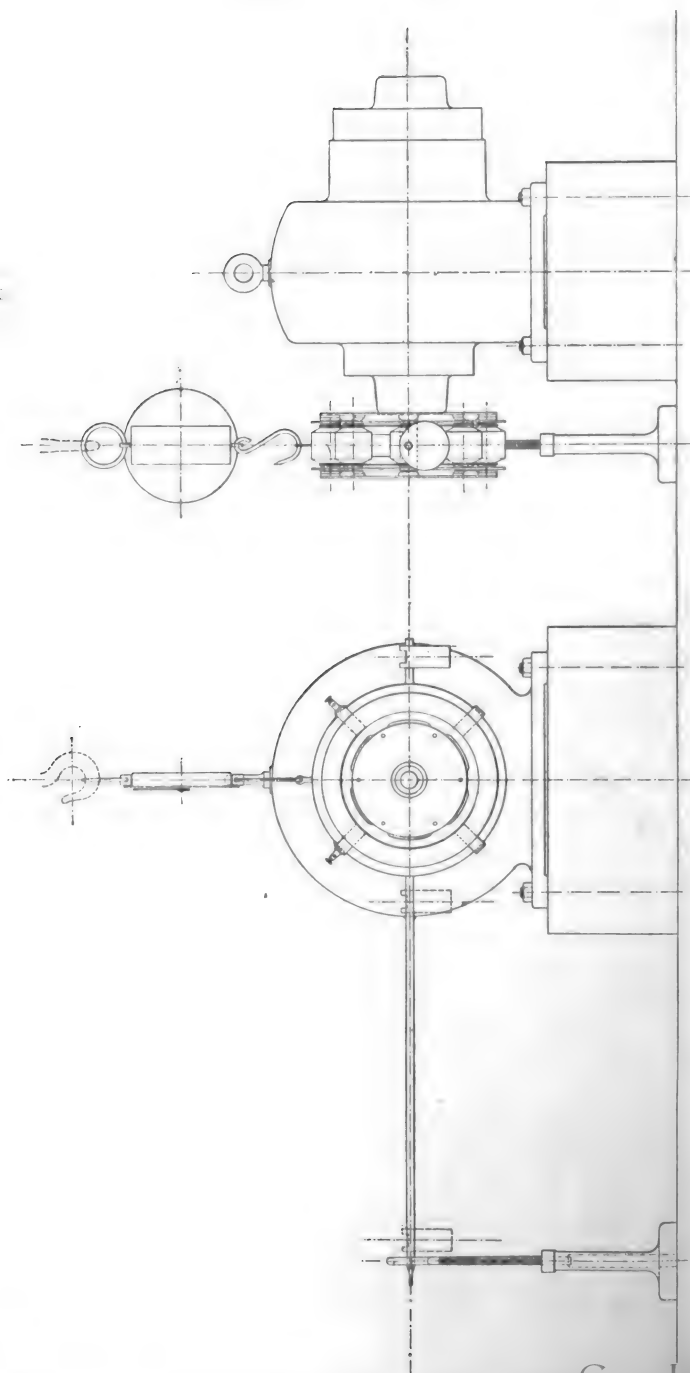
Motor Testing Brake—Eddy Current Type.
